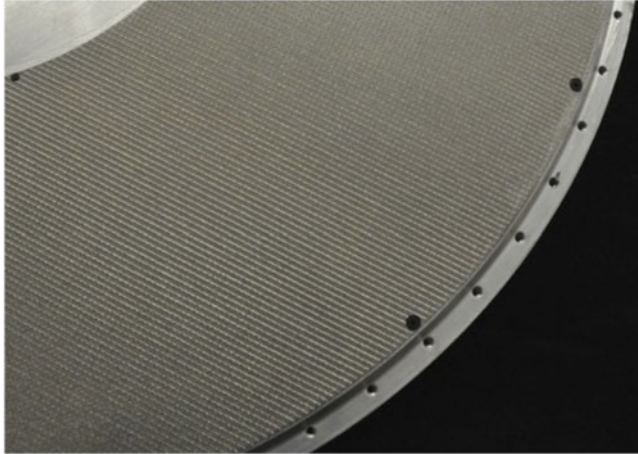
Close-up view of the pressed wire mesh that covered the holes through the rotating disk.
